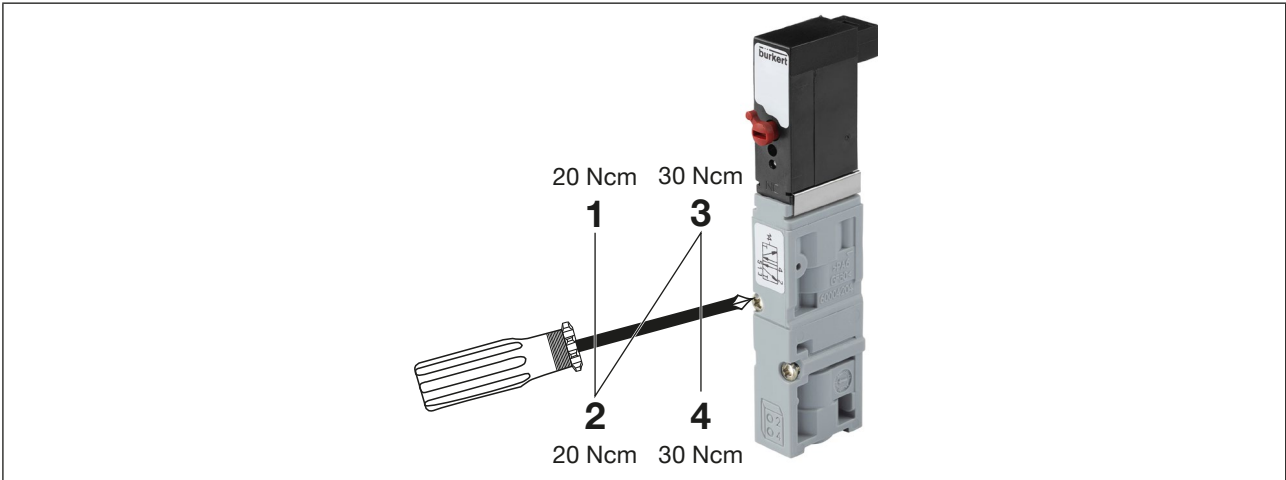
Tightening the screws for valve replacement type 6524 and type 6525
